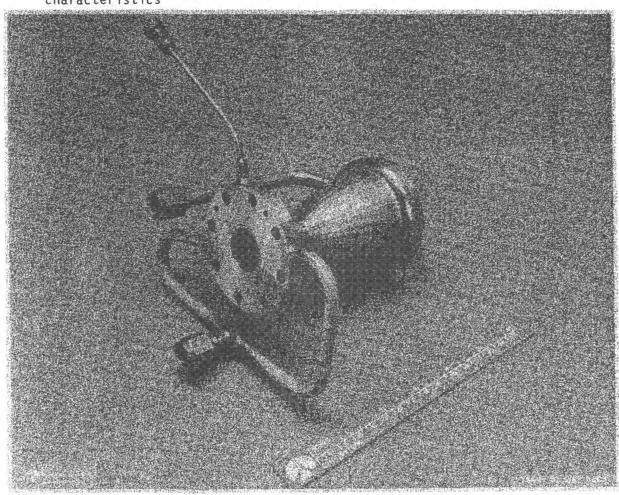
Thrust Chamber Assembly (15521-8/5/87-C1C\*)
